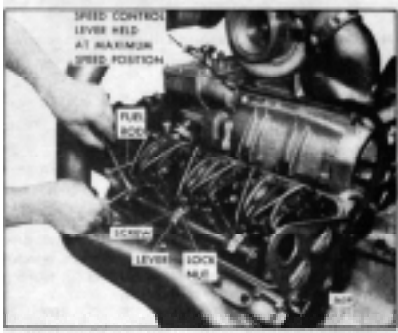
Positioning No. 1 Injector Rack Control Lever (One Screw and Lock Nut Assembly)
